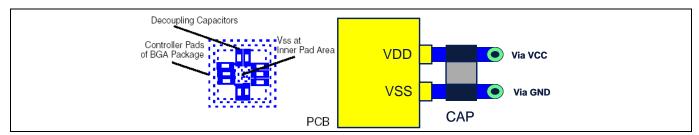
Decoupling of a typical BGA (left) and lead-frame (right) package
